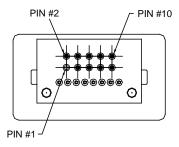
shows the SR4210 panel-mount receptacle. Refer to the spec sheet for dimensions.
